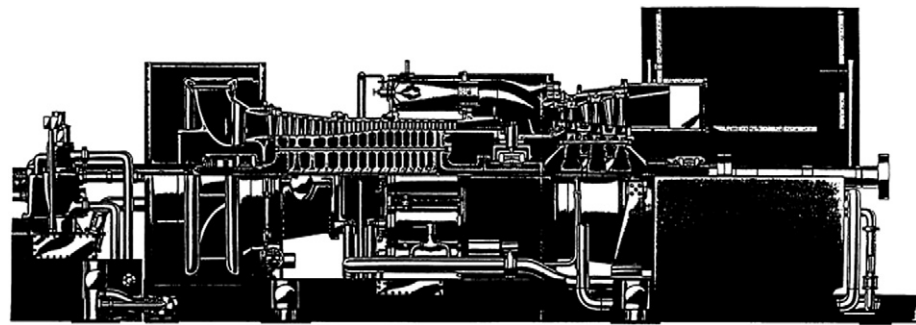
• Single shaft industrial gas turbine (Courtesy of General Electric)
